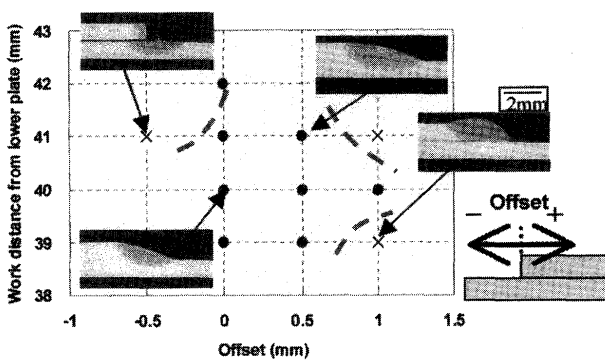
Effect of offset distance on weld bead of AA5022 lap-fillet welding
